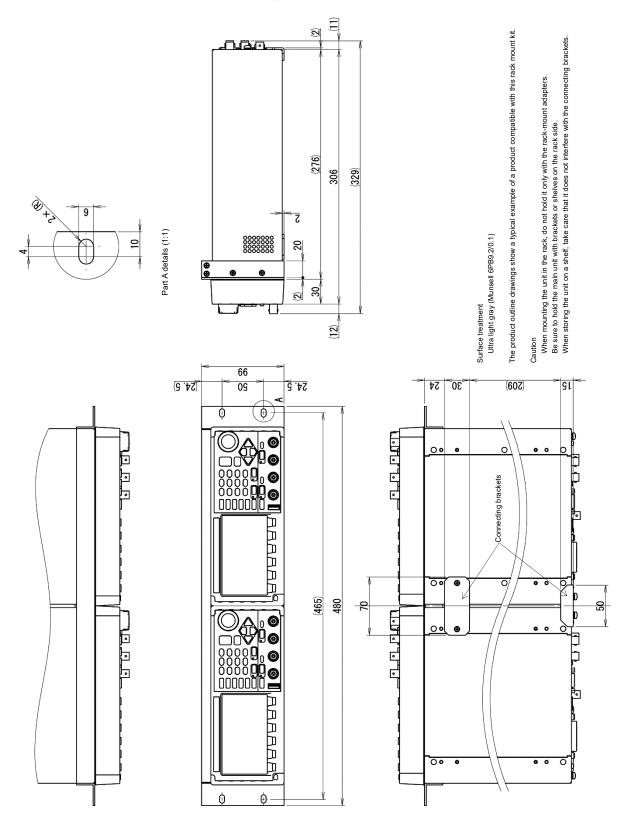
Rack mount dimensional drawing (JIS, for 2 units)
